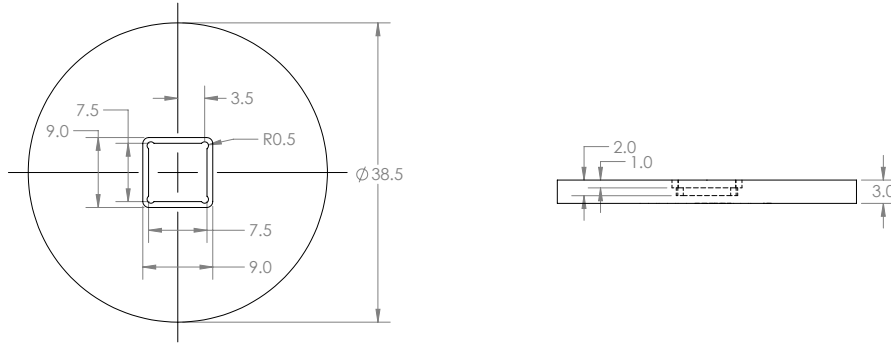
Schematic drawing of the pocketed sample holder optimized for rimless SCD growth on 7.0 mm \times 7.0 mm substrates including dimensions in mm.
